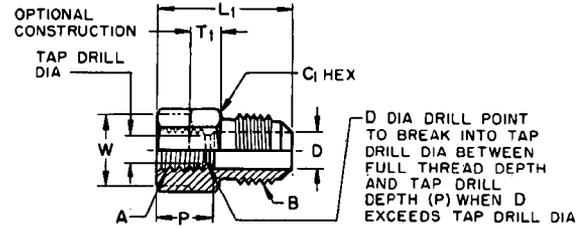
INTERNAL THREAD REDUCING CONNECTOR (HALF UNION)
